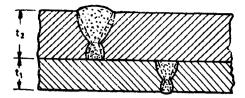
WELDS CONNECTING FLANGE PLATES STAGGERED
